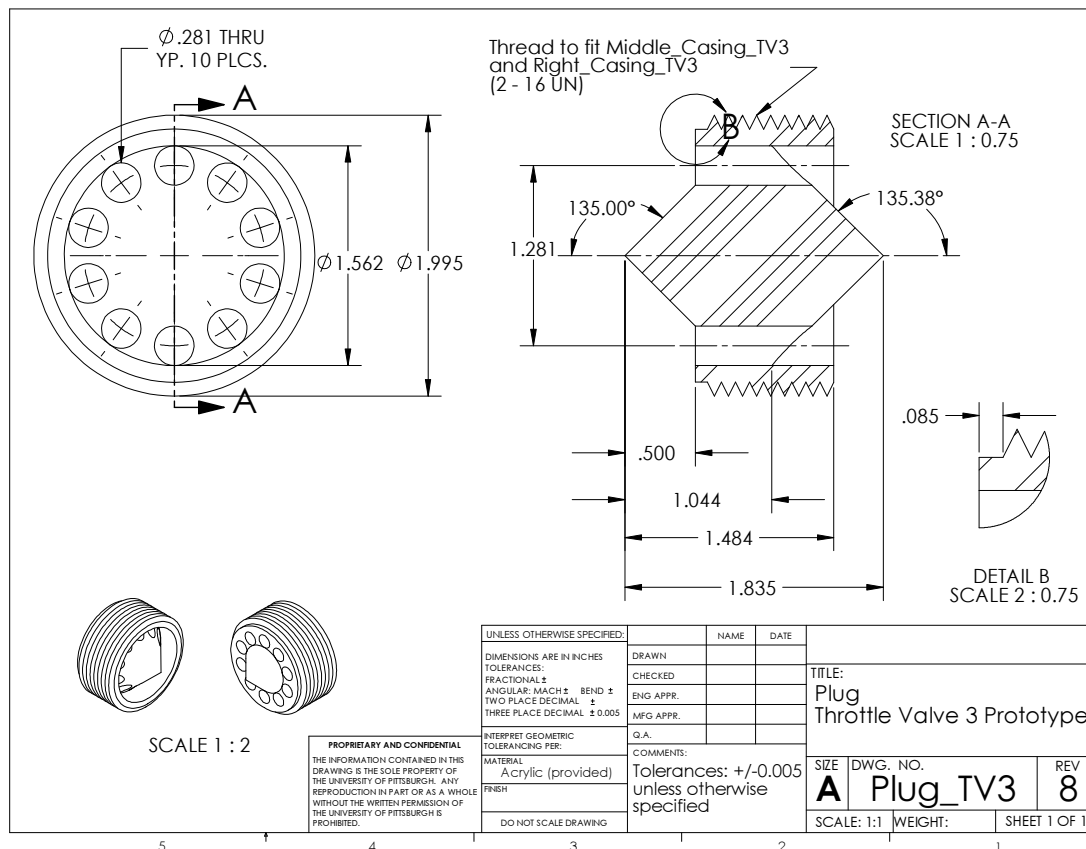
Barrel plug component drawing for split-flow plug valve prototype (TV3).
